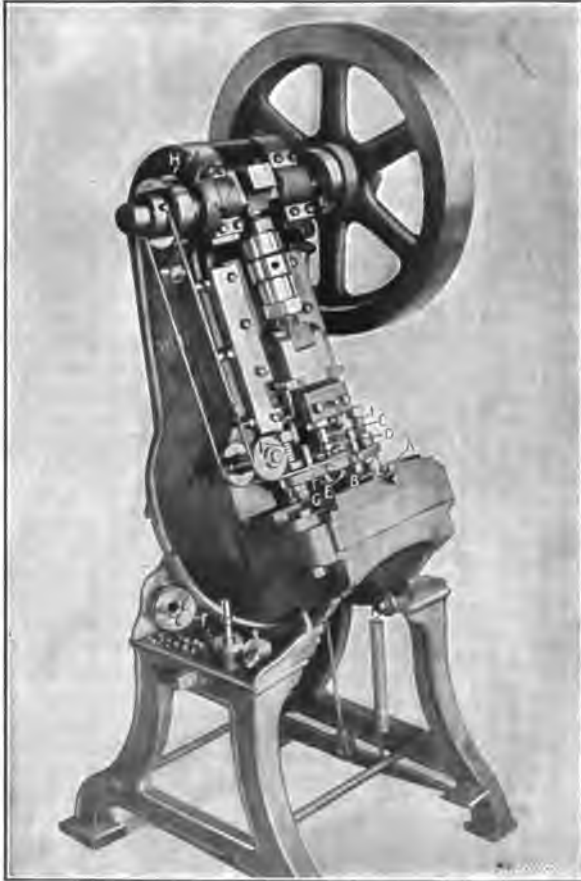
Bliss Cap-forming Press with Unscrewing Attachment
